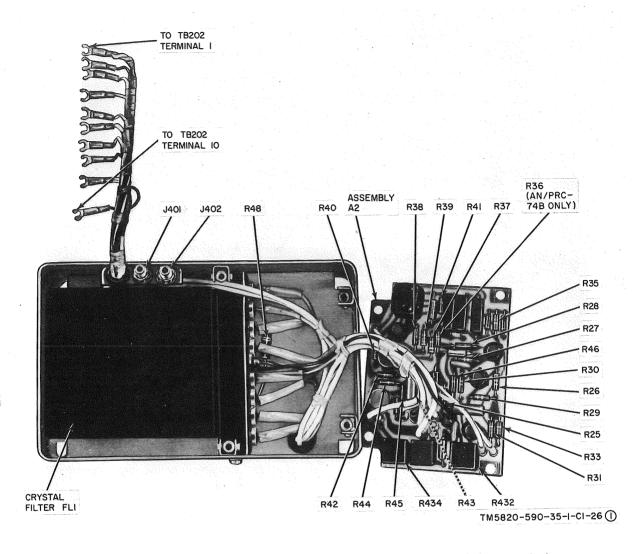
(). IF audio module front view, component boards removed (part 1 of 2).
